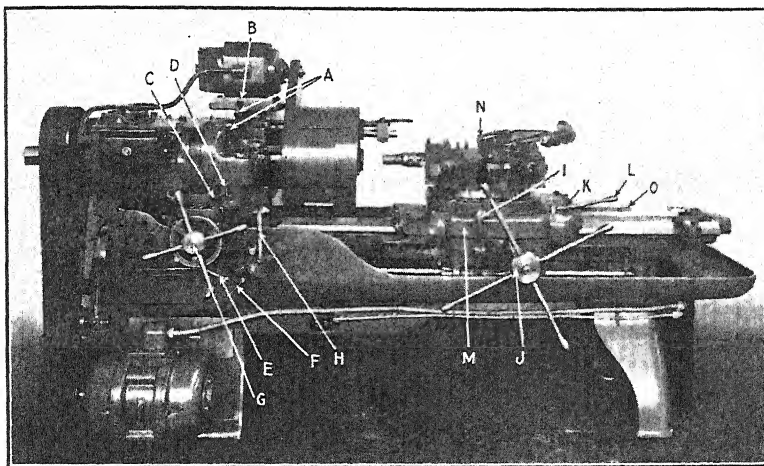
The Warner and Swasey No. 3A Universal, Hollow Hexagonal, Saddle-Type Turret Lathe Equipped with Overhead-Piloted Standard Chucking Equipment.
